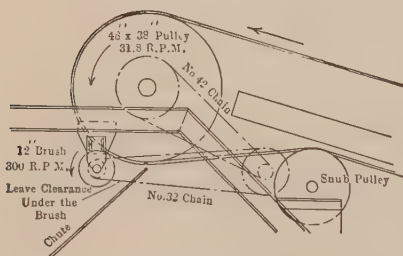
Head of Belt Conveyor and Drive for Cleaning Brush.
